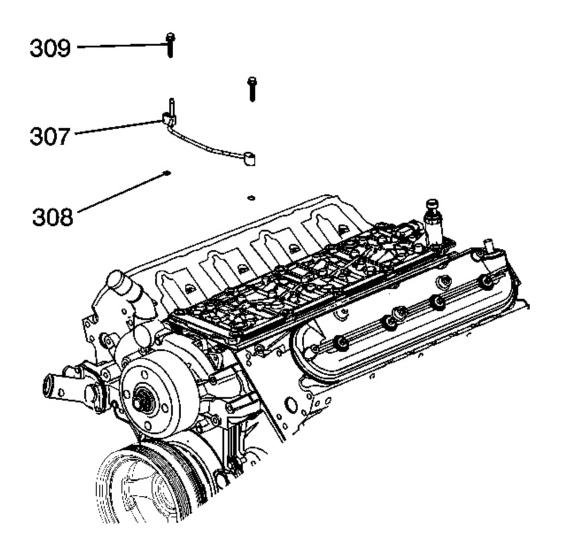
Engine Coolant Air Bleed Pipe Courtesy of GENERAL MOTORS CORP.
